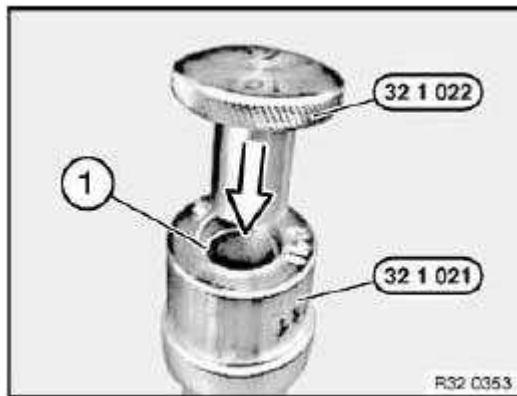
Pressing Spring Ring Into Connection Using Special Tool (32 1 022)
